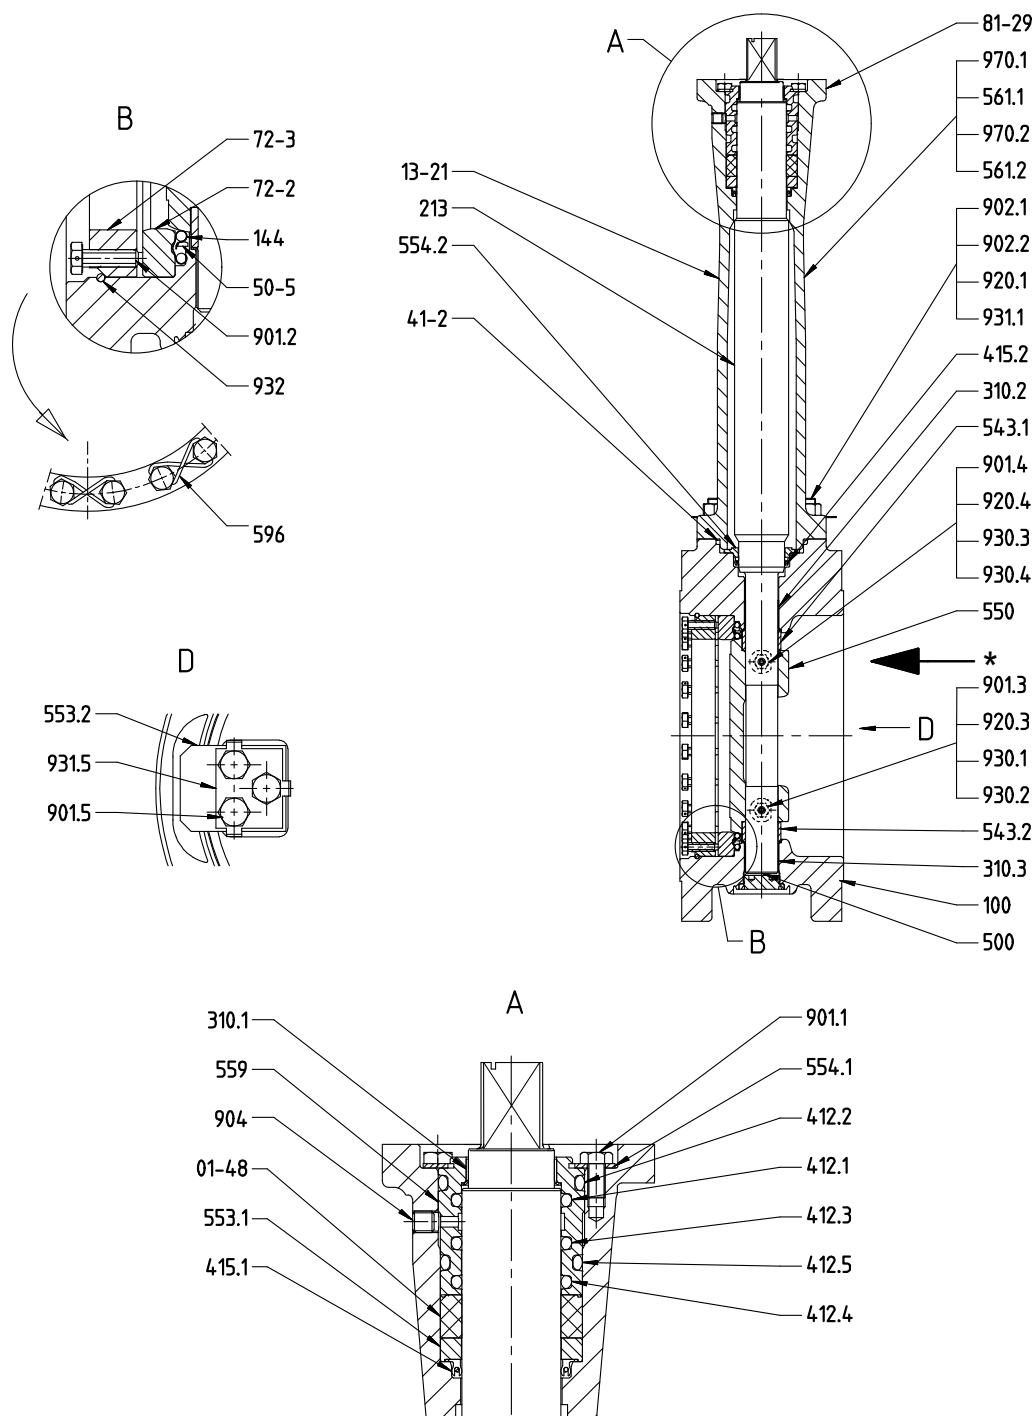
Sectional drawing of DANAIS CRYO T7 - DN 200-250 (8-10 in.)
